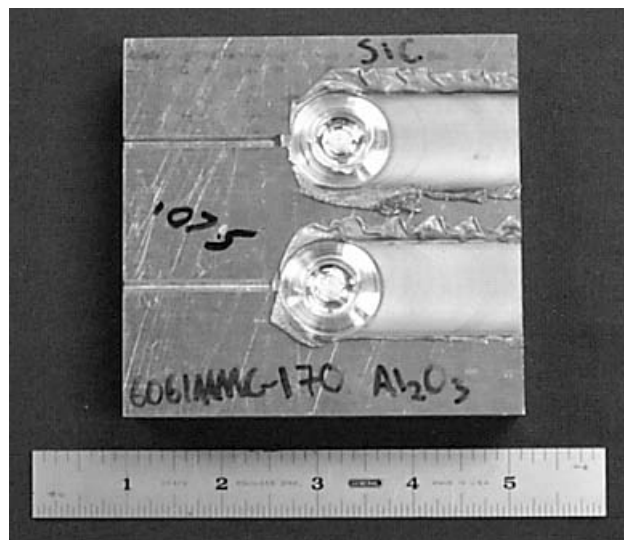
Friction stir processed 6061 plate with ceramic particulate incorporated into the surface.
